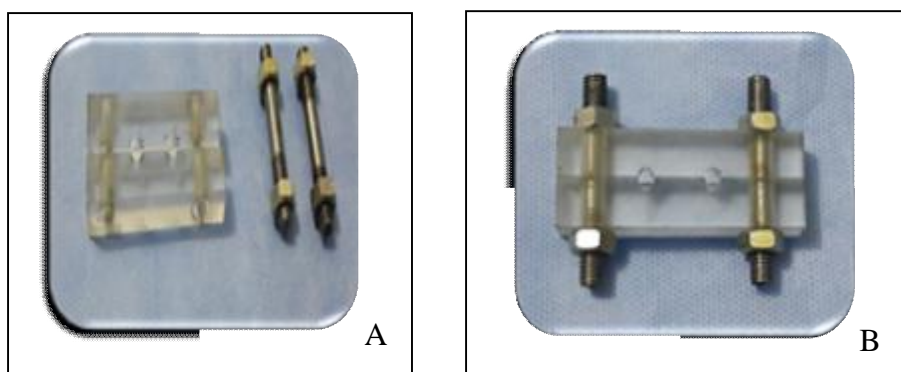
Teflon mold used in this study; A teflon mold with two holes and two screws, B the mold hold with screws.
